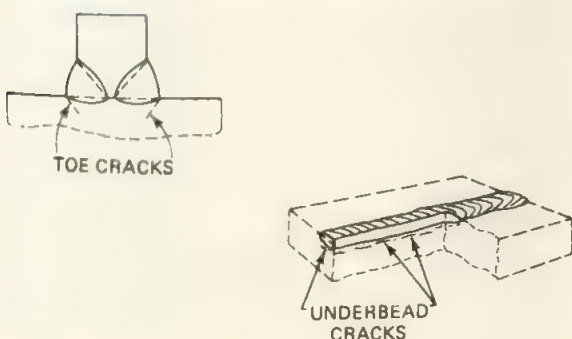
Weld toe cracks and underbead cracks.
